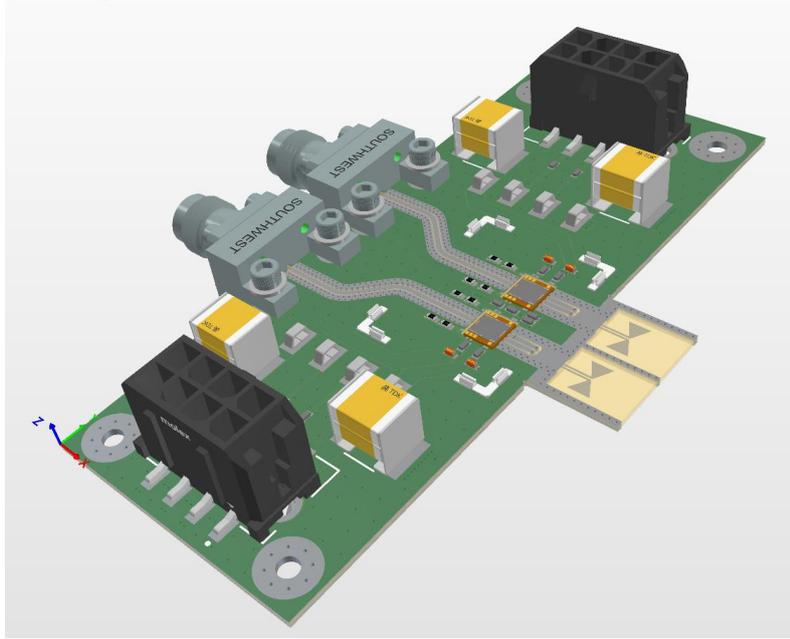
DRIFT Demonstrator PCB with Dipole.
